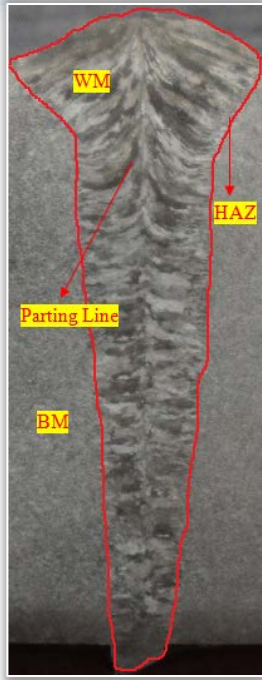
Macrostructure of EBW welds showing base metal (BM), weld metal (WM) and heat affected zone (HAZ)
